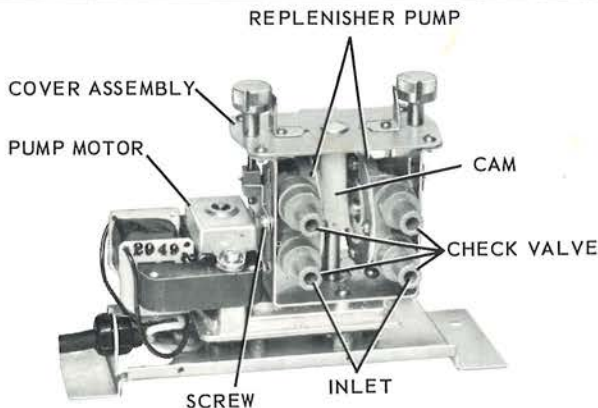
REPLENISHER PUMP ASSEMBLY (COVER REMOVED)
